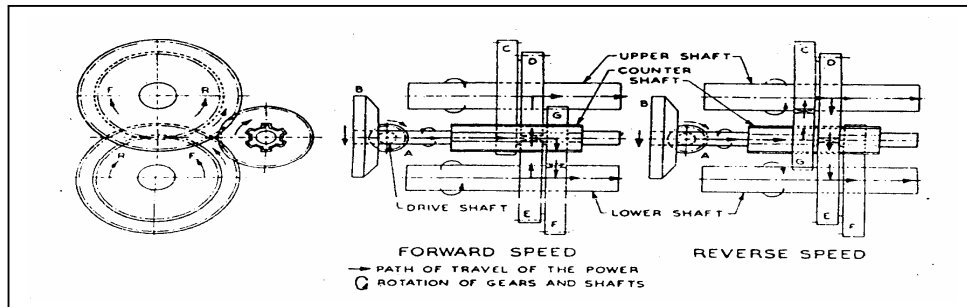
POWER TRANSMISSION THROUGH FEED REVERSING SYSTEM FOR CHAFF-CUTTER THRESHER
